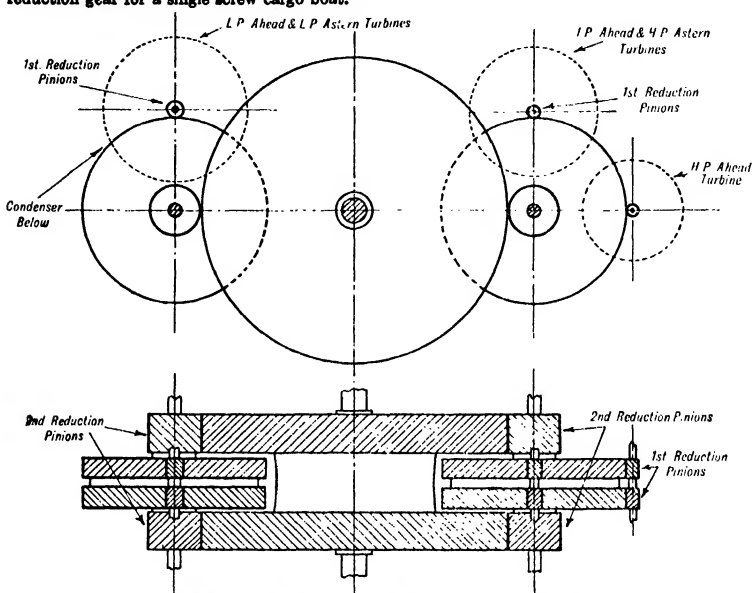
Parsons' Double Reduction Gearing for Single Screw Cargo Boat.
